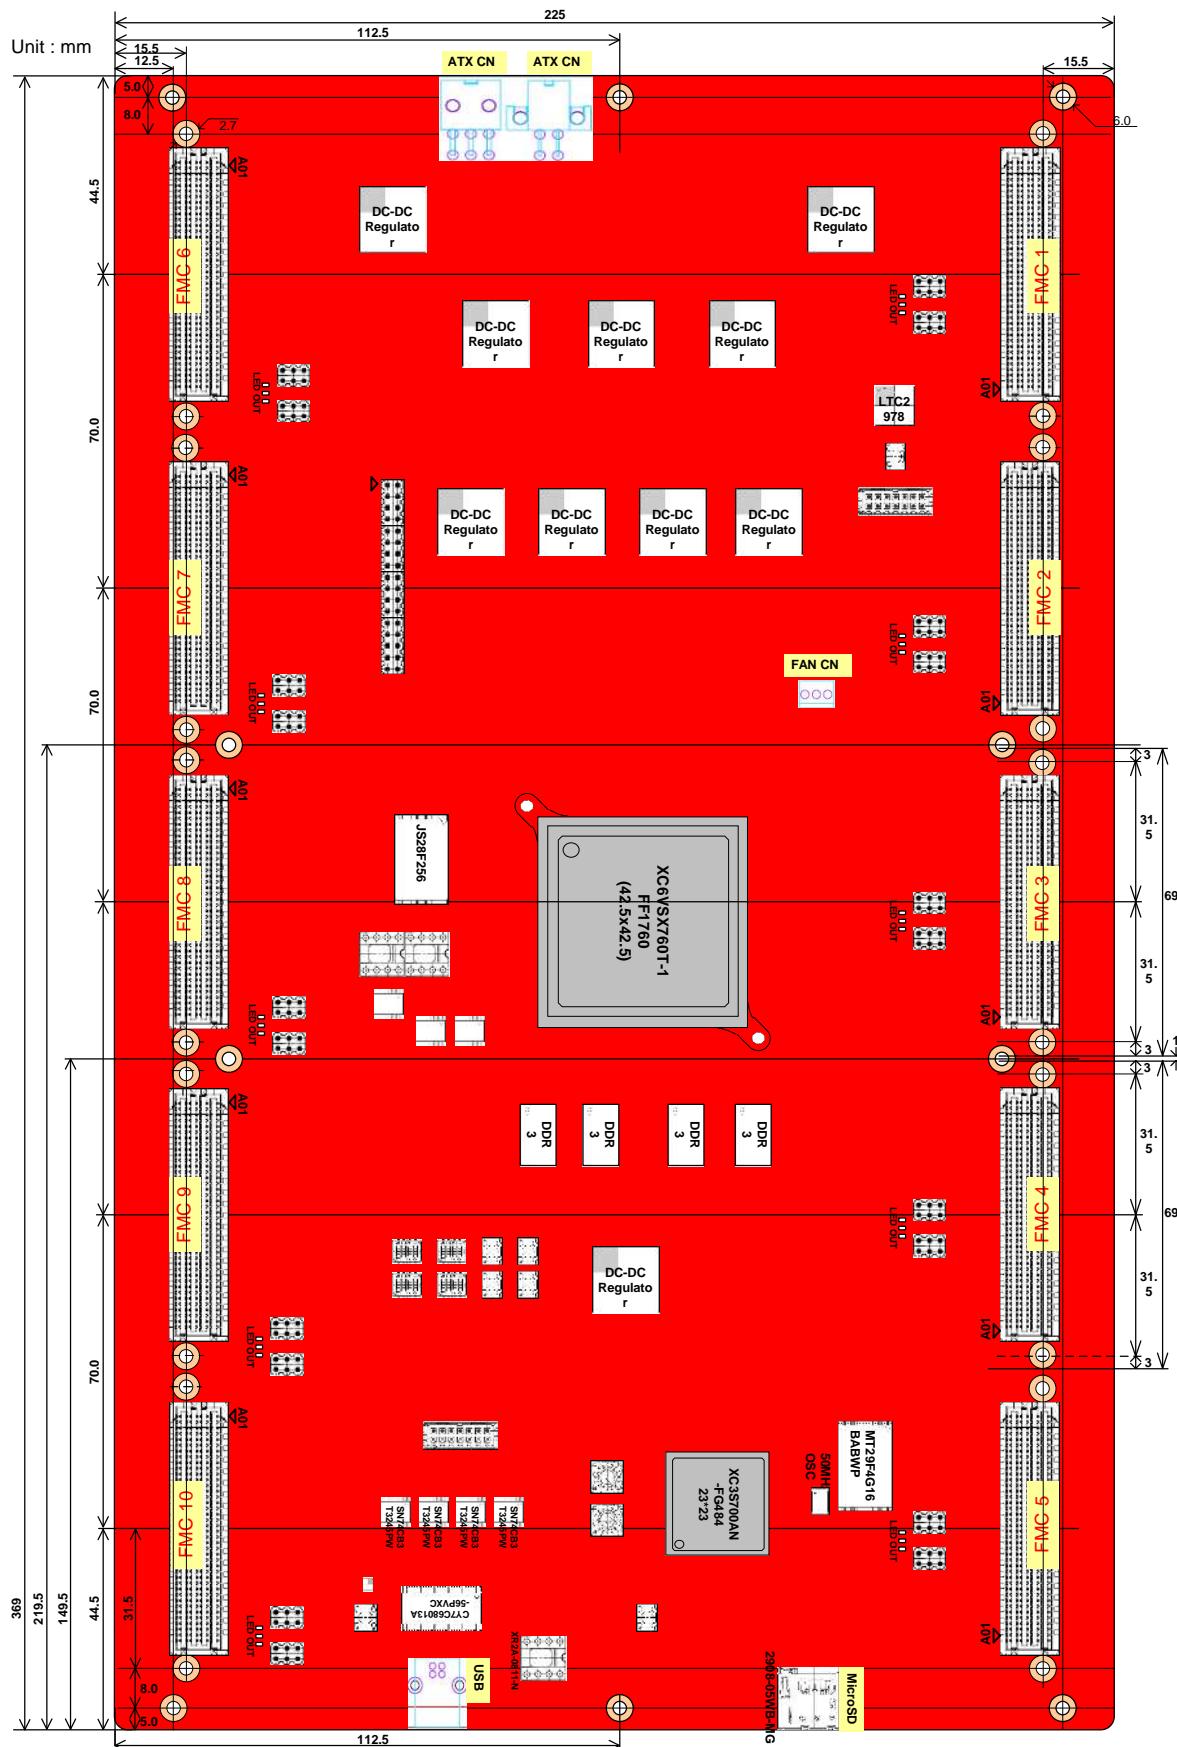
Layout of TB-6V-LX760-LSI Board Components
